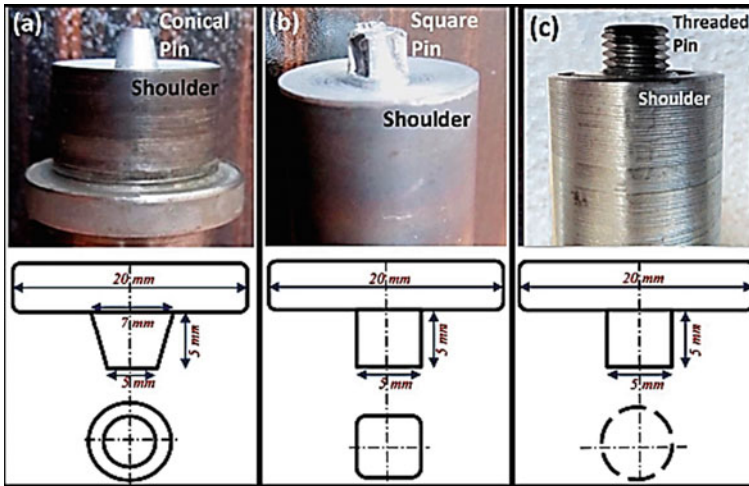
Tools pin shapes utilized for the AA1100 weld preparation [24]
